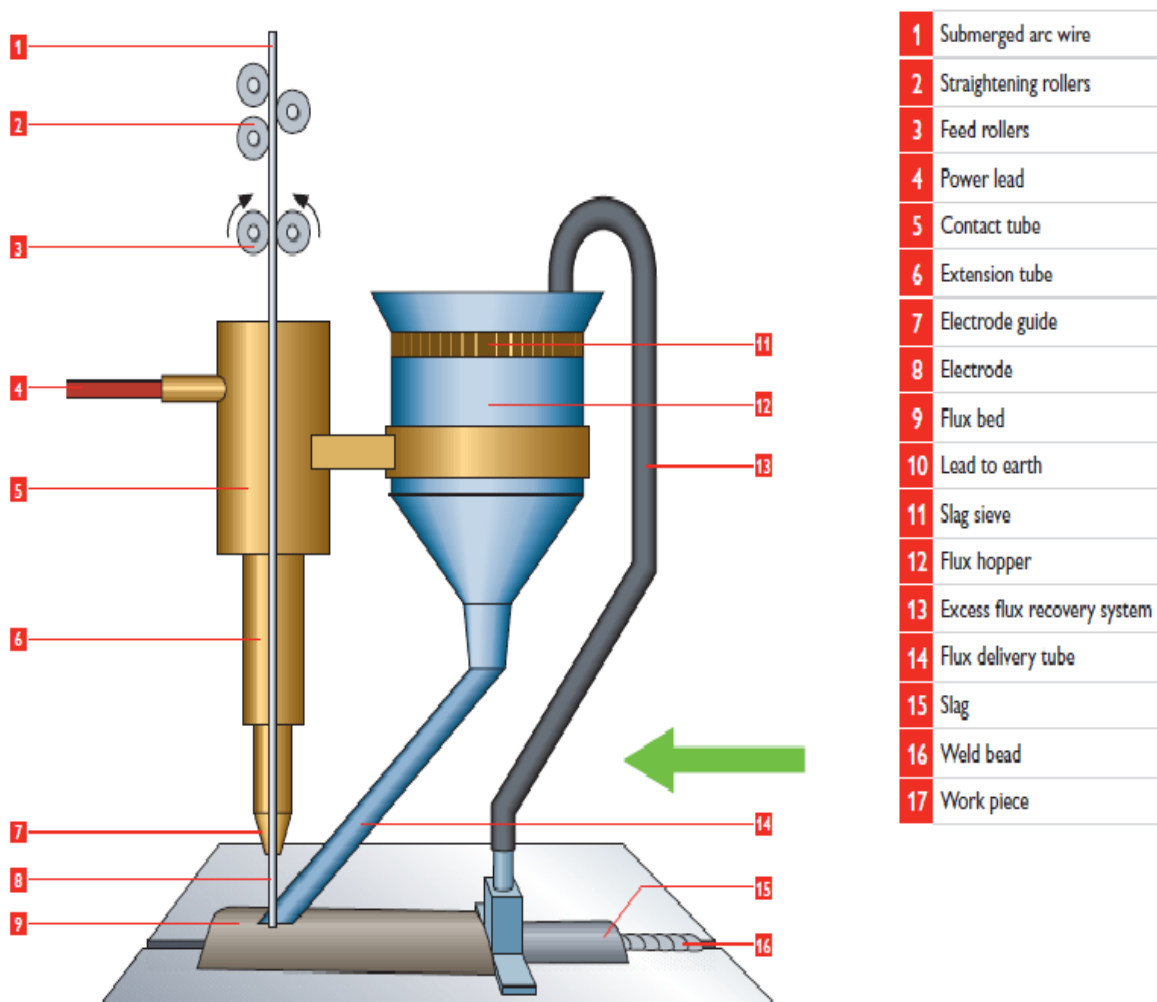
(SETUP FOR SUBMERGED ARC WELDING)[7]
